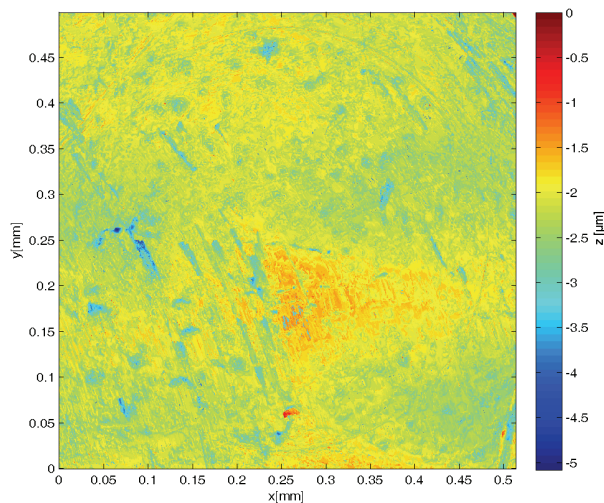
Surface topography after tool-workpiece contact for speed of 15 000 RPM and 0.5 mm tool diameter
